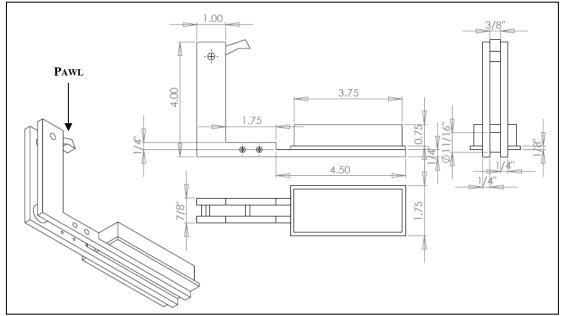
Basic dimensions of the bottom jaw of the current prototype
